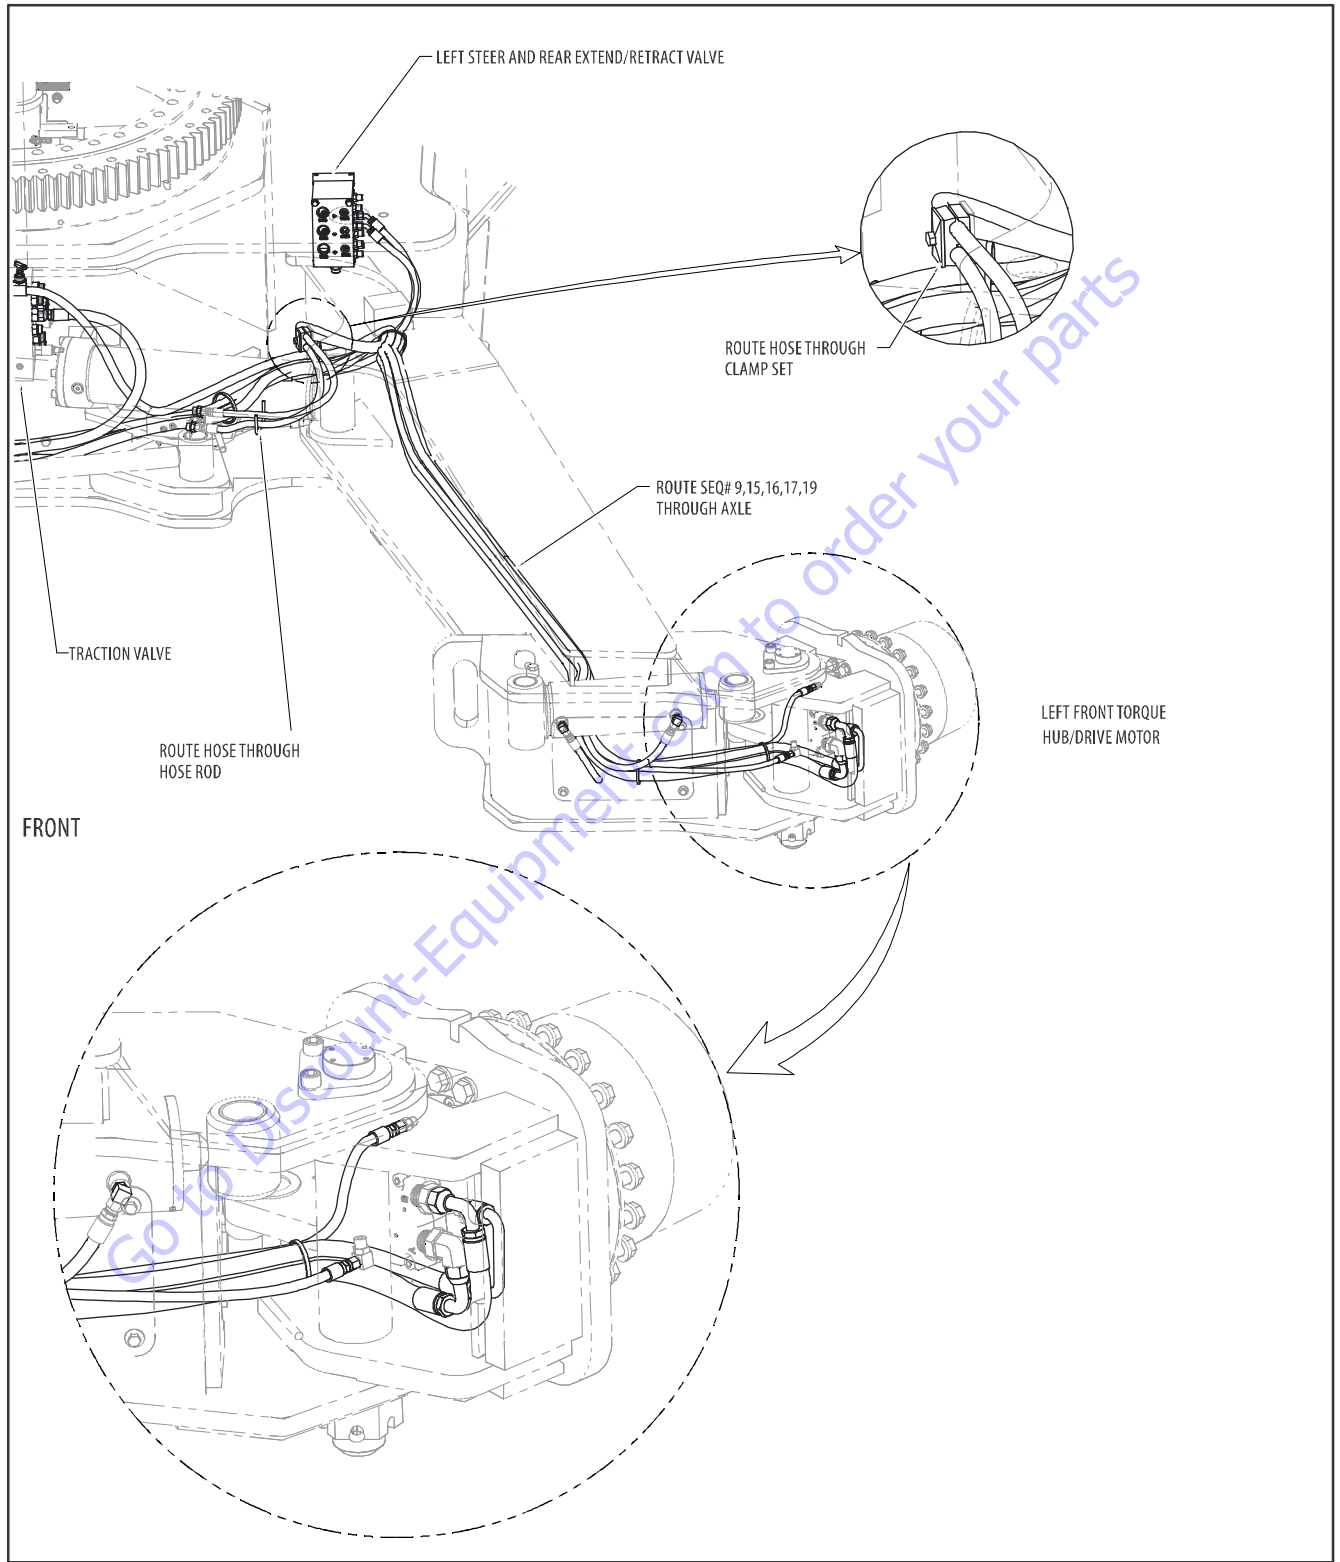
Axle Hose Routing - Sheet 2 of 2
